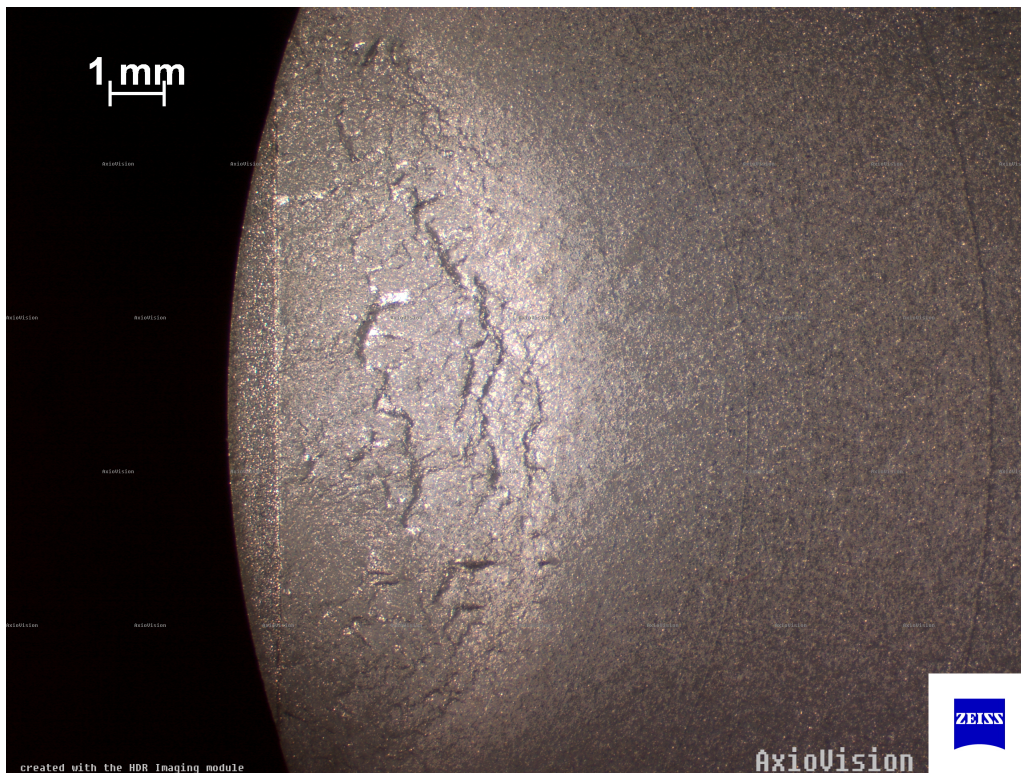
Picture of the fracture surface of specimen 1B.
